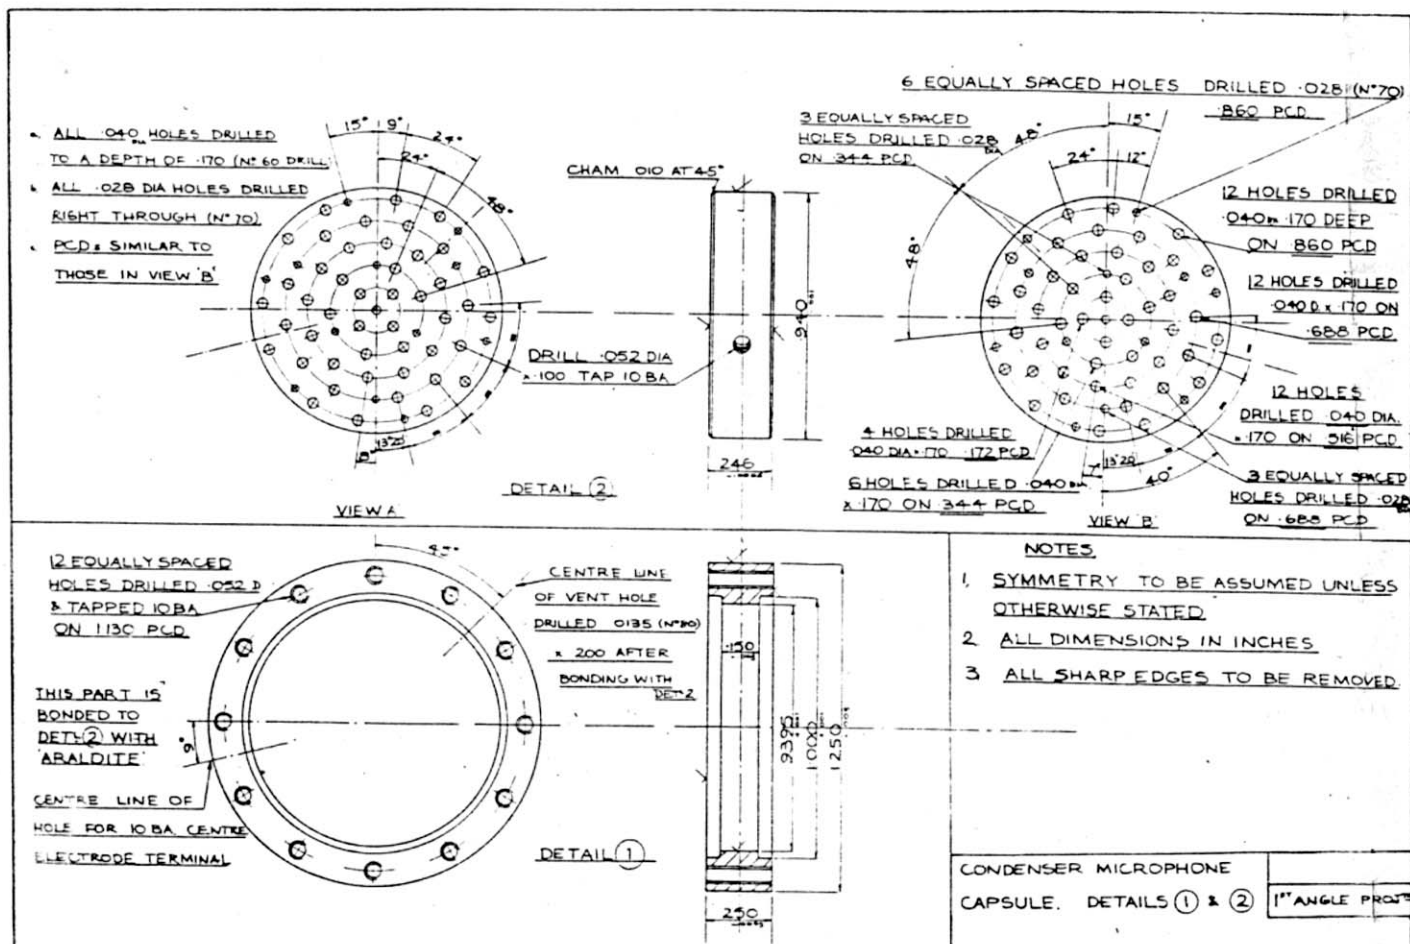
Precise details of the holes to be drilled in the capsule; this is a tricky job which must be performed accurately
